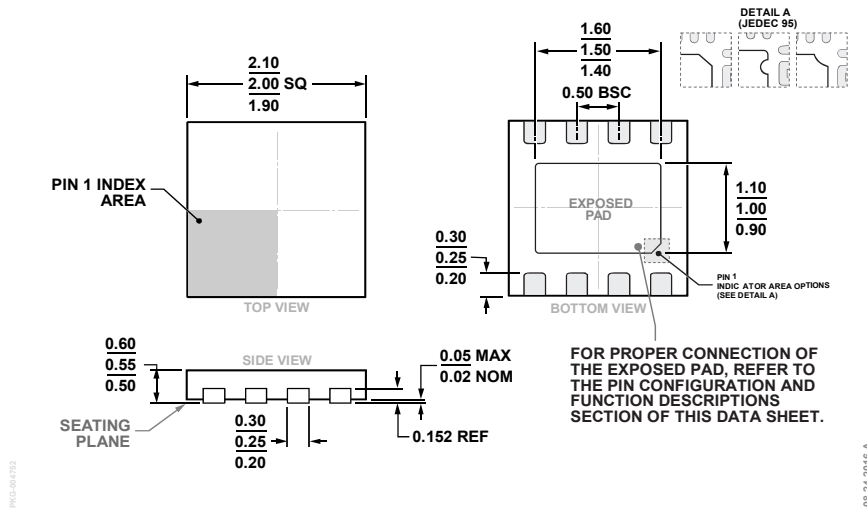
8-Lead Lead Frame Chip Scale Package [LFCSP]
